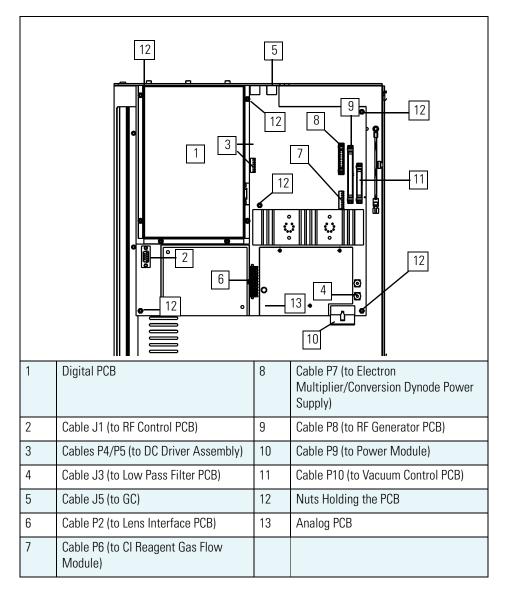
Analog PCB Assembly (Left Side Panel, Top)
